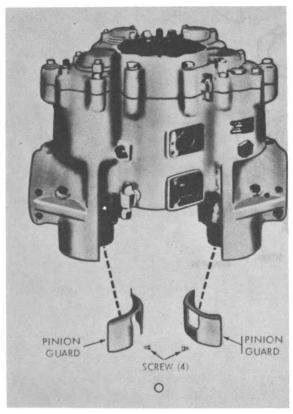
Traversing gearbox disassembly or assembly (6 of 15).
